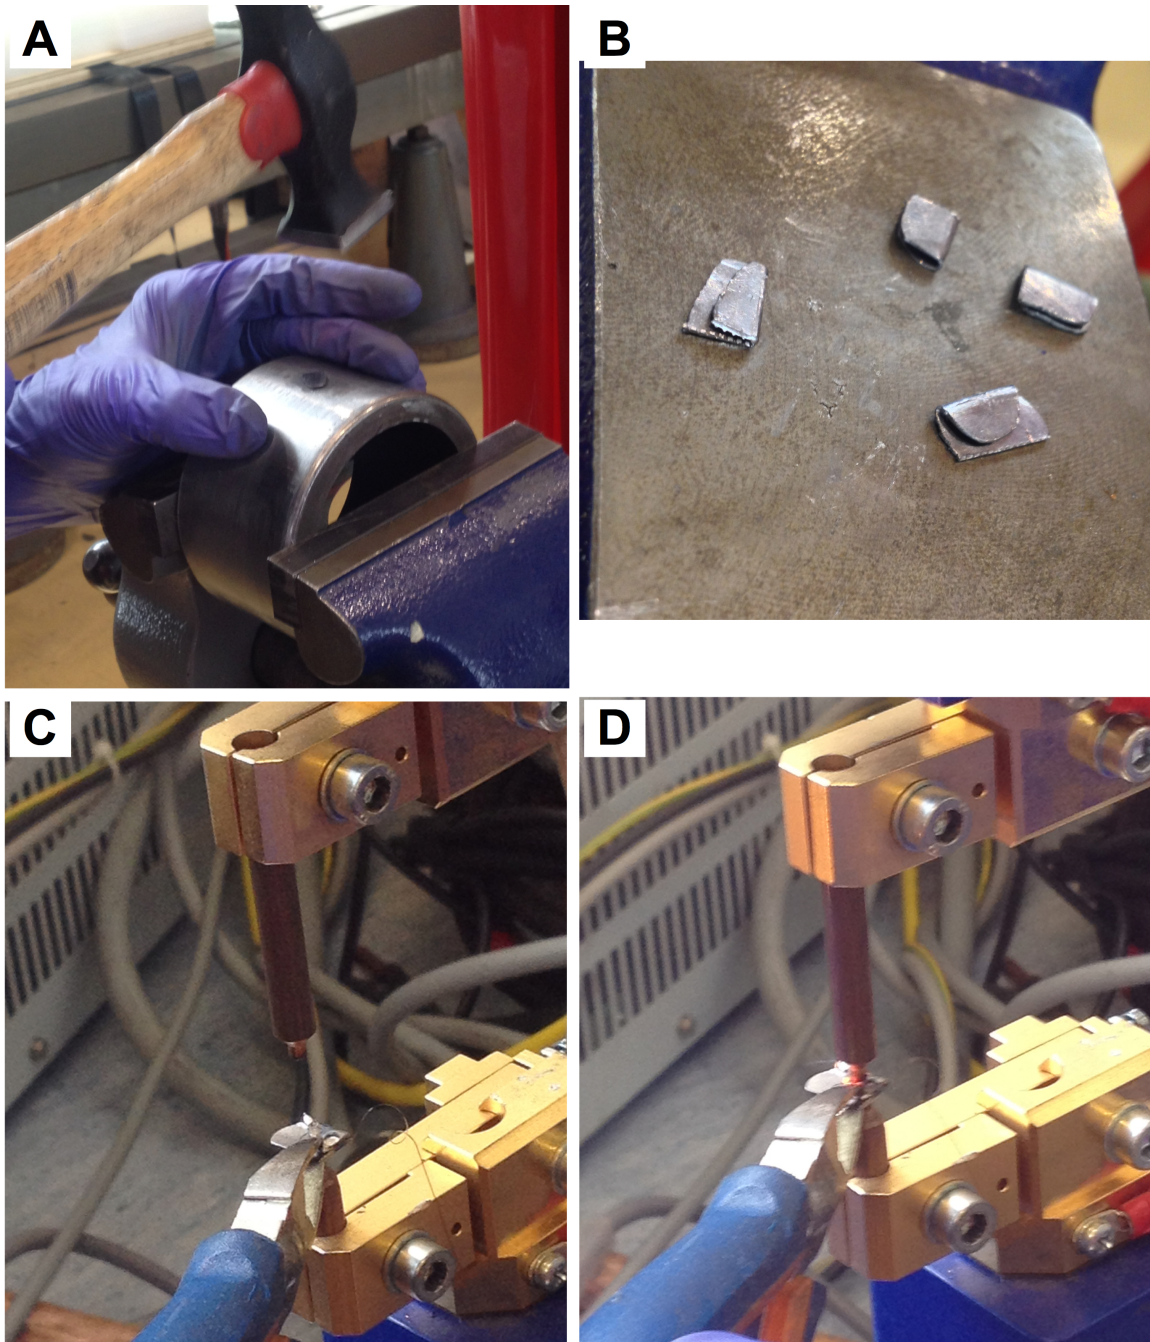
Procedure of the resistance spot welding of the NbTi wires of the self-shielding coils. (A, B) Preparation of V-shaped thin NbTi sheets. (C, D) Spot welding of the V-shaped piece and inserted NbTi wires. (C) A twisted pair of the wires are inserted in the V-shaped sheet, placed on the spot welder.
